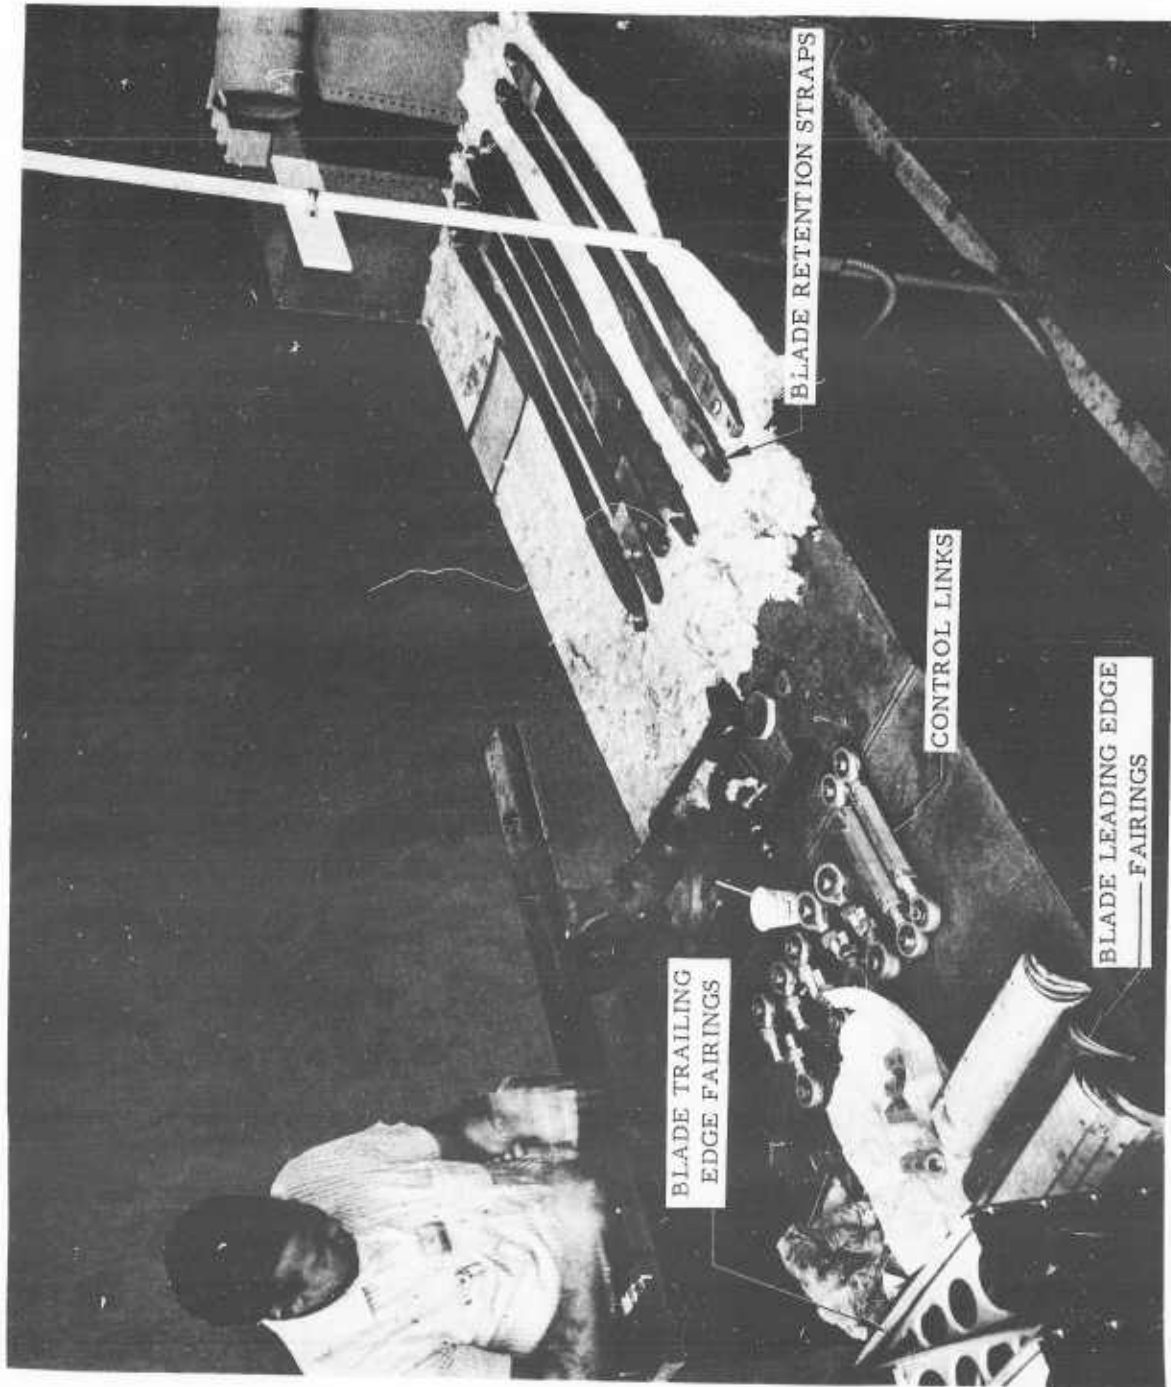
Rotor Disassembled for 35 Hour Inspection
